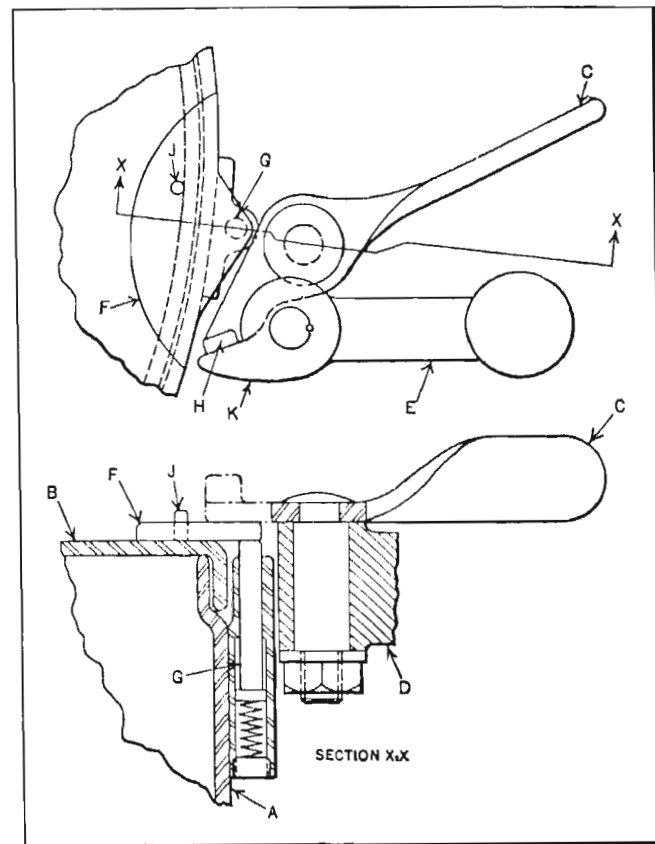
Safety Locking Device which Prevents Accidental Shifting of the Clutch Lever
